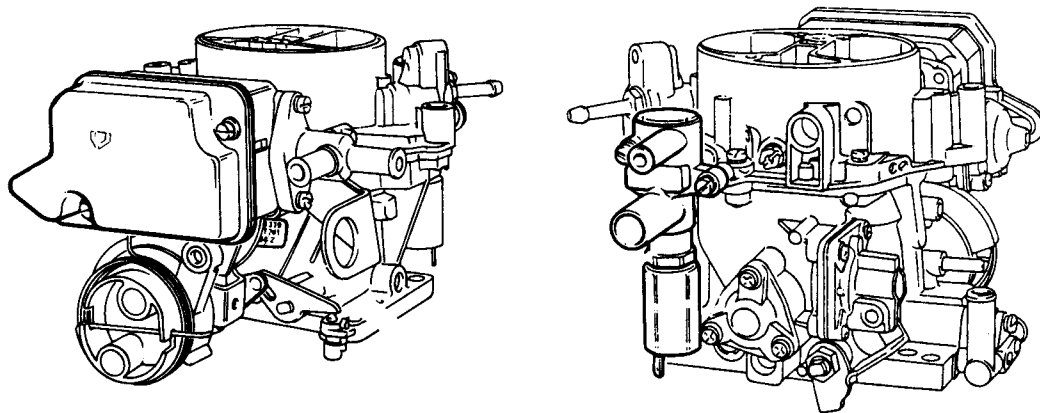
Solex Z1 carburettor (Sec 1)
